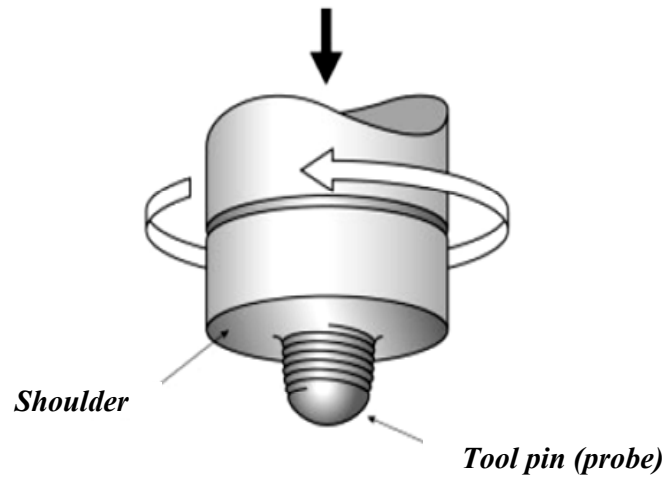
Schematic of a cylindrical threaded pin used in Friction-stir welding (FSW).
